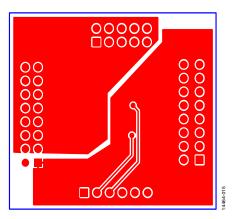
EVAL-AD5328DBZ Daughter Board Bottom Side Routing
